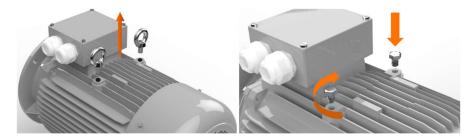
Replacing eyebolts with hexagon head screws for motors with increased IP protection class and Ex motors
